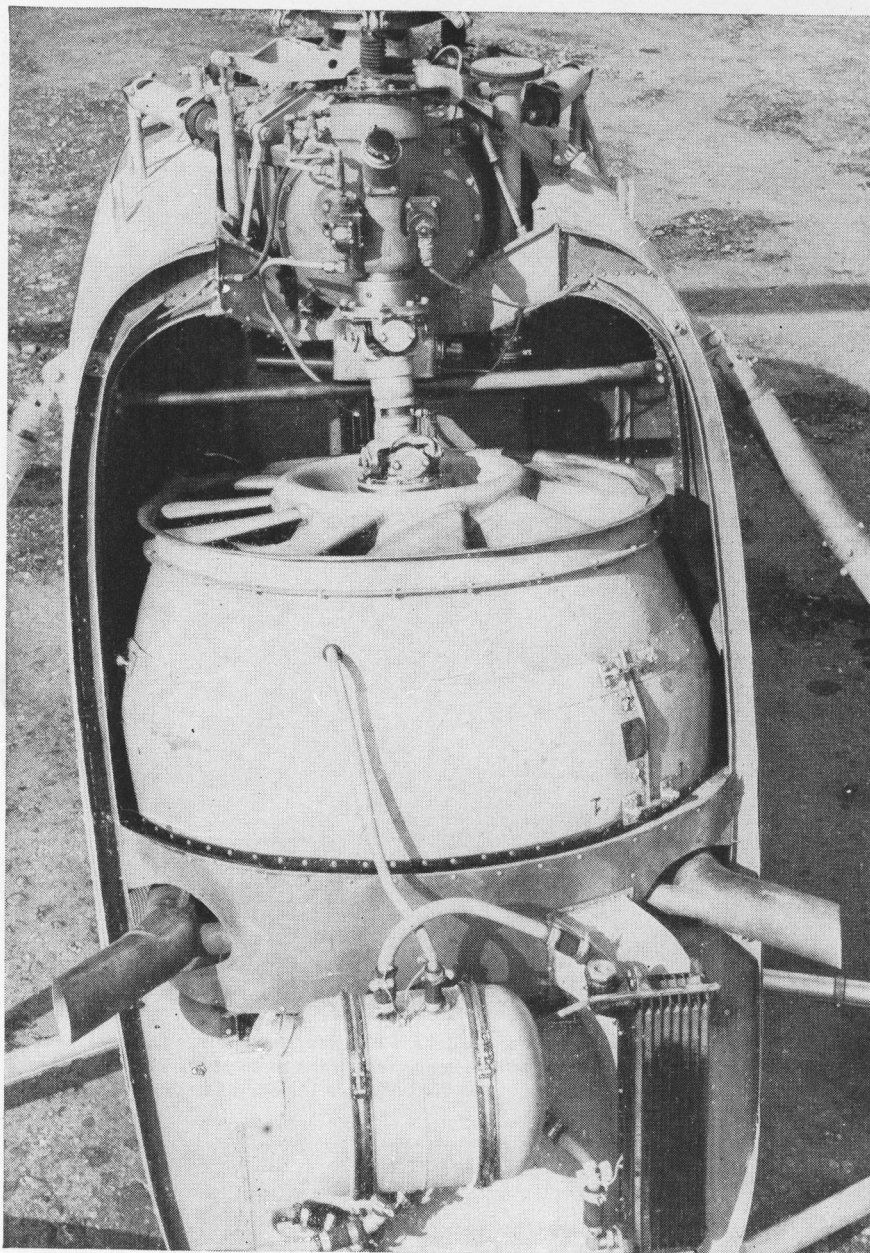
Model J engine compartment showing (from the bottom up): engine oil tank and oil cooler between exhausts; engine cooling shroud; fan (mounted to flange on clutch); drive shaft with universal ends; overrunning clutch; and transmission.
